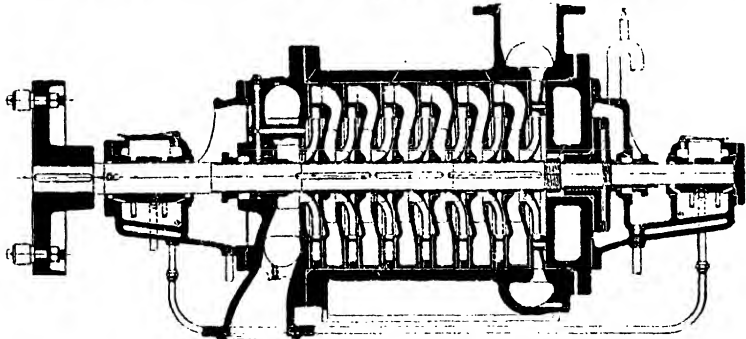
Section of multi-stage turbine pump (drum-type casing).
